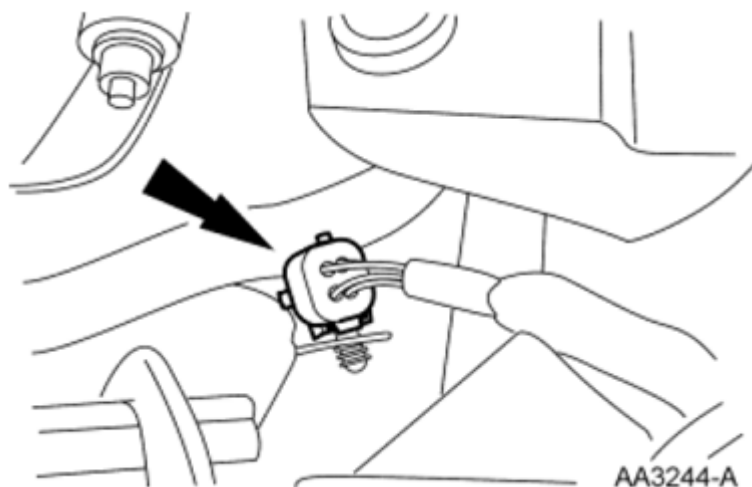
Identifying Exhaust Gas Oxygen Sensor Socket (303-476)
